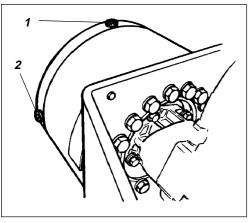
Torque hub 1. Filler plug 2. Level/Drain plug
